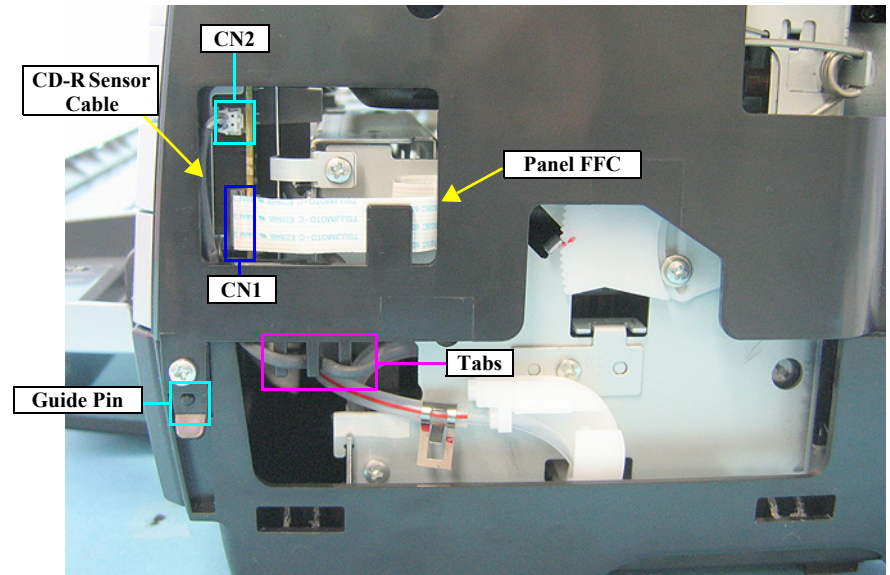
Disconnecting the CD-R Sensor Cable and Panel FFC
